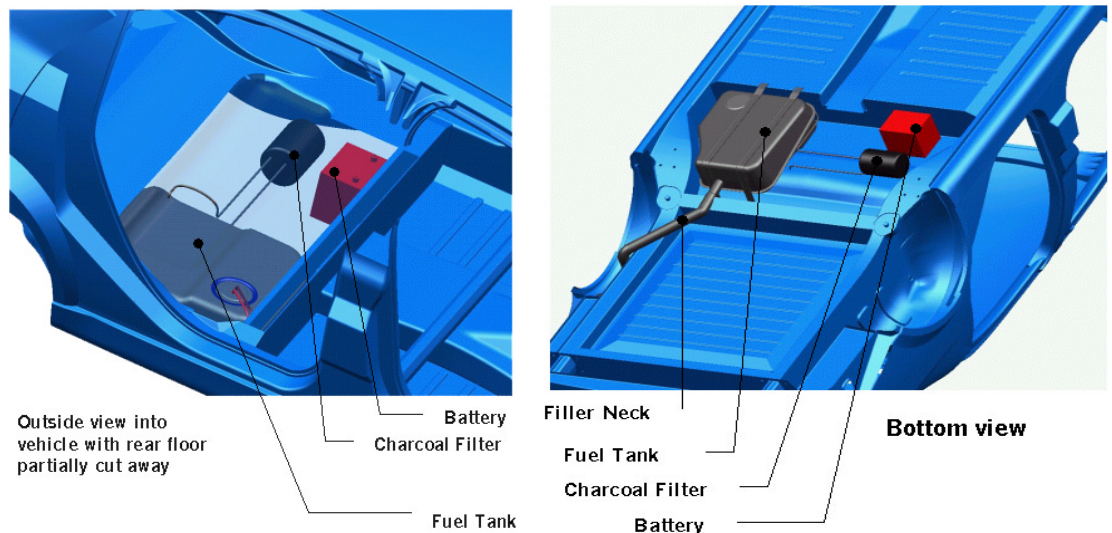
Fuel tank, charcoal filter and battery package
